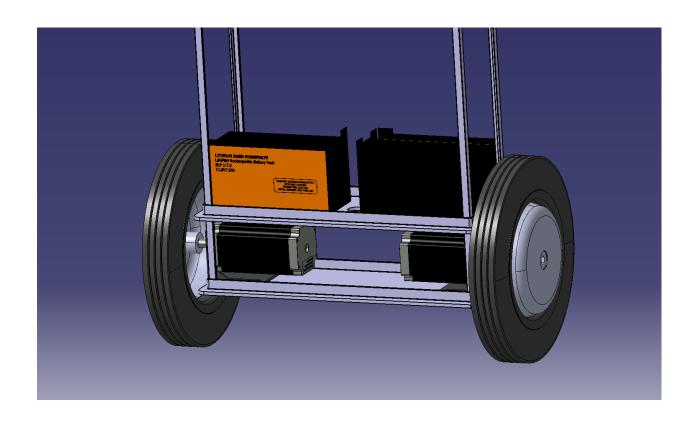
The CAD design above demonstrates how all of the power related pieces come together to make up the chassis and axle. The metal framing will be constructed from 2020 aluminum extrusion and the plates going up will be of steel sheet metal
